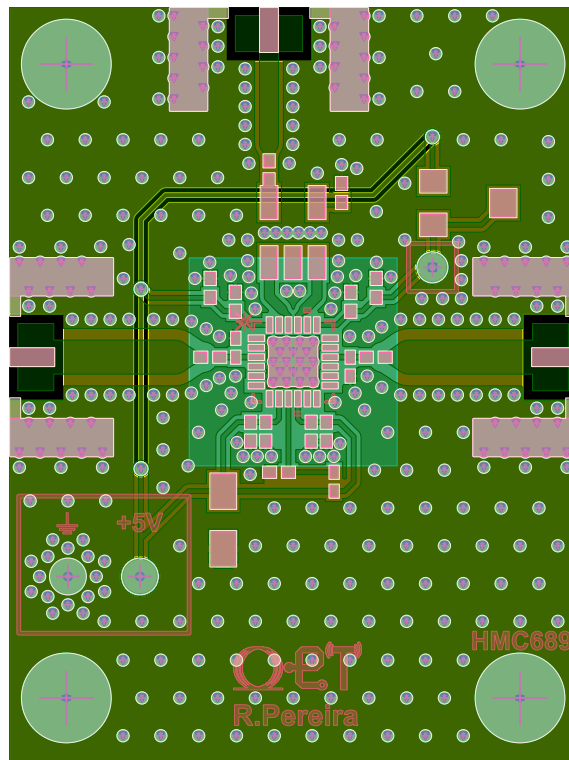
View of the Gerber files designed for the Mixer HMC689 board.
